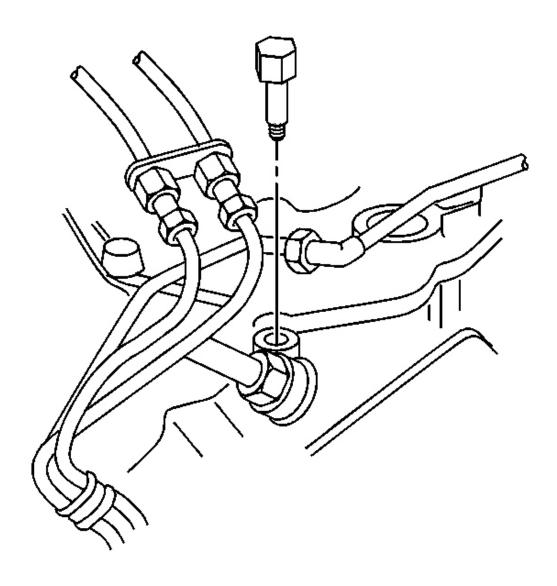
Fuel Pump/Oil Pressure Sensor Fitting Courtesy of GENERAL MOTORS CORP.
